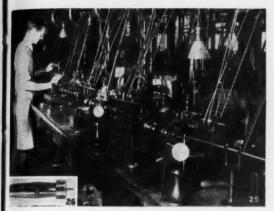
Battery of automatic screw machines, each of which can make 10,000 gold screws per day. Fig. 26—Spring-die (actual size) with which 260-P threads are cut.
